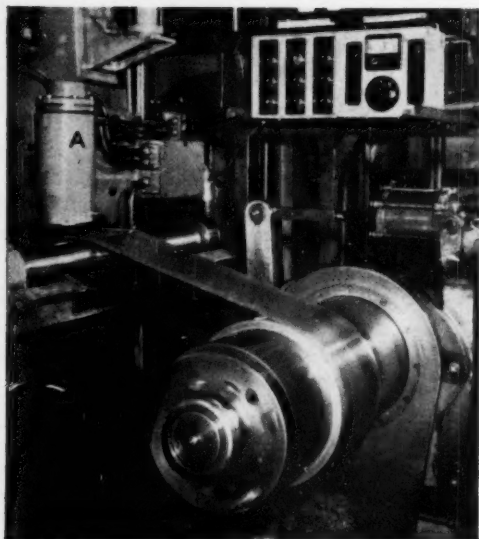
Close-up View Showing Part of the Measuring Head and the Indicator Panel
